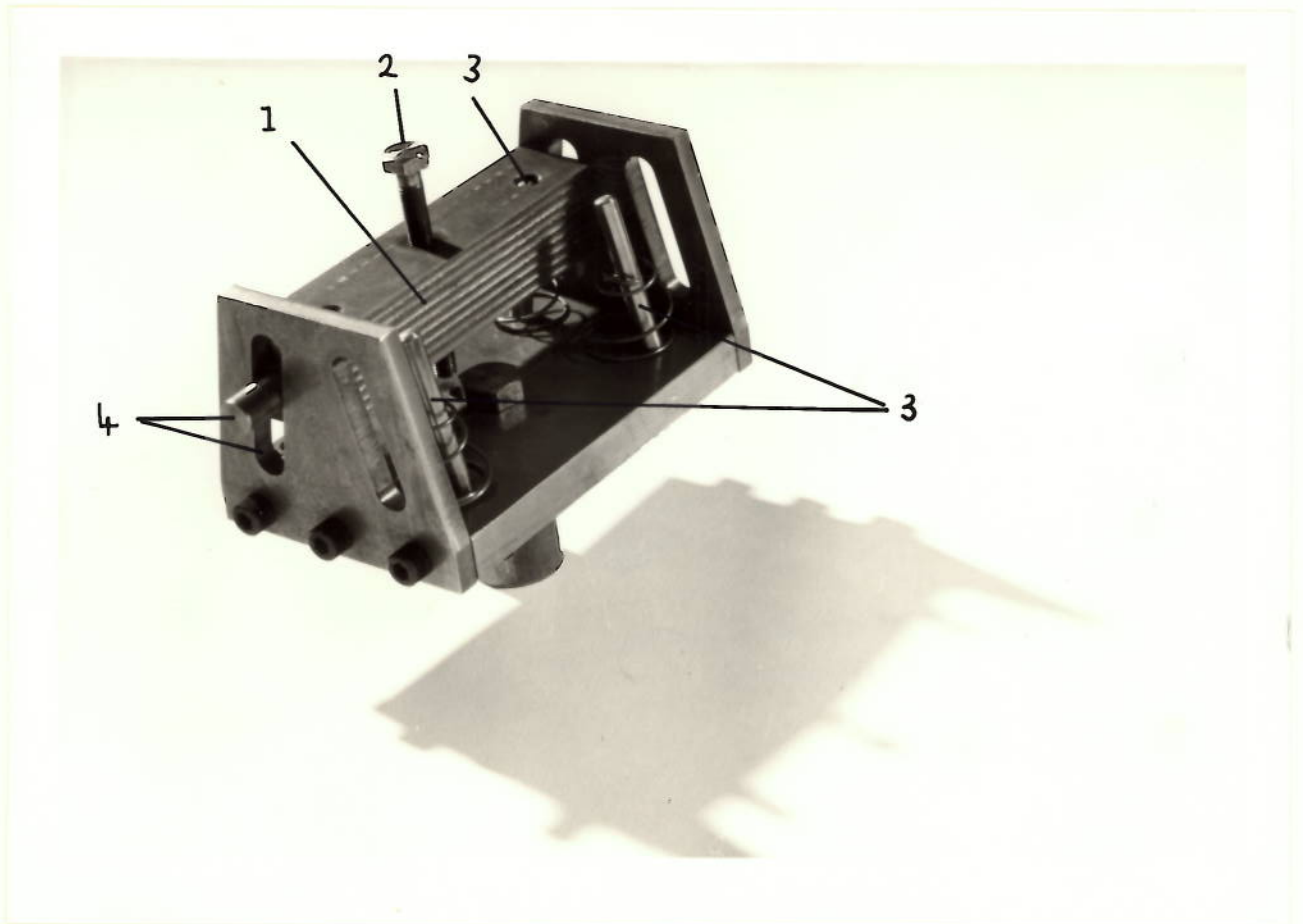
The hot-drawing machine grip construction. (One of the grip faces removed).
